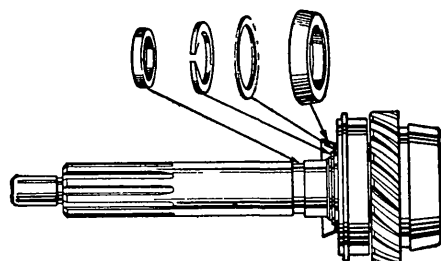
Oil seal and slinger in synchronmesh transmission main drive gear, 1946-52
